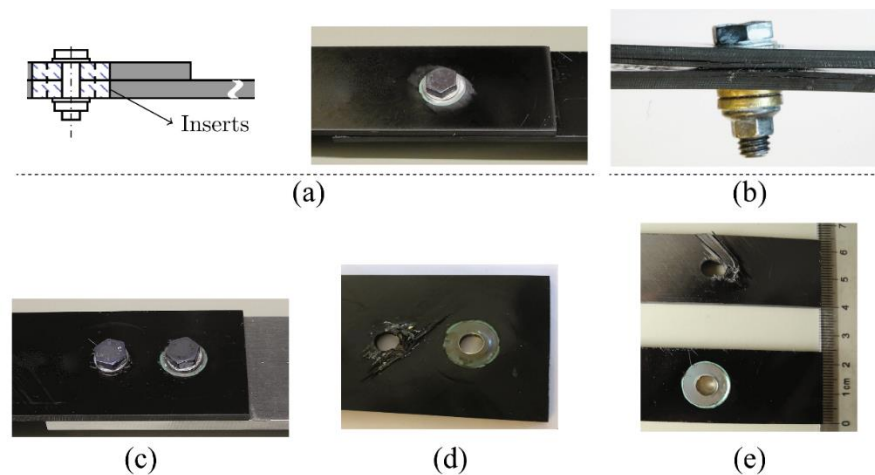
(a) Single-lap composite bolted joint with inserts, (b) damaging layers under secondary bending moment, (c) single lap, double-bolted joint, one with insert, another without insert, (d) open-hole tensile damage with/without insert (Akbarpour & Hallström, 2020)
